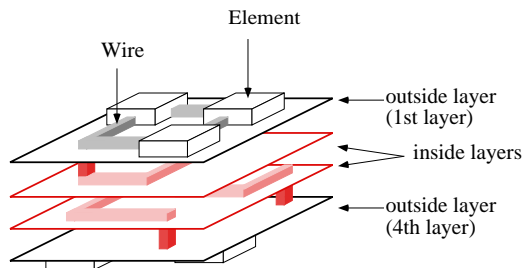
A schematic explanation of layout design of an n -layered printed wiring board with $n=4$.
